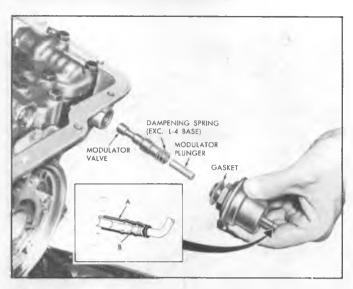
PG--Vacuum Modulator, Dampening Spring, Plunger and Valve
